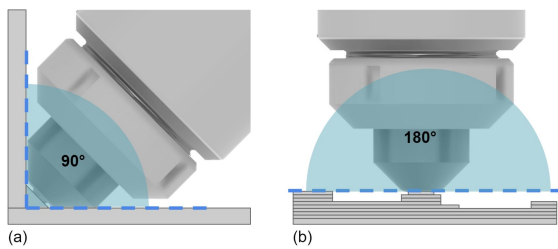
Design freedom; (a) the PinPoint extruder is geometrically constrained for fillet welding purposes; (b) the layer-by-layer deposition sequence of an AM structure implies more design freedom for the extruder.
